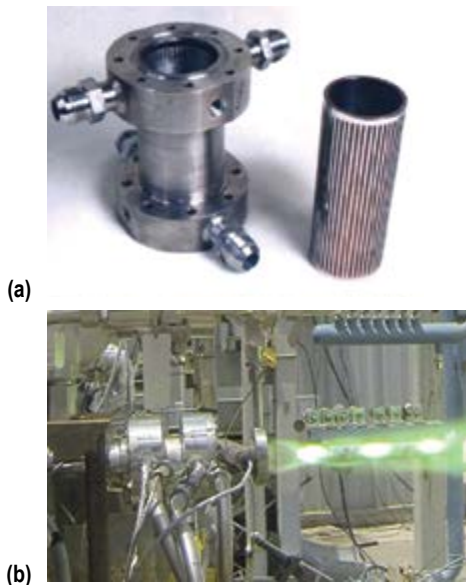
(a) Combustion chamber assembly and chamber liner showing machined channels, and (b) hot-fire testing.
